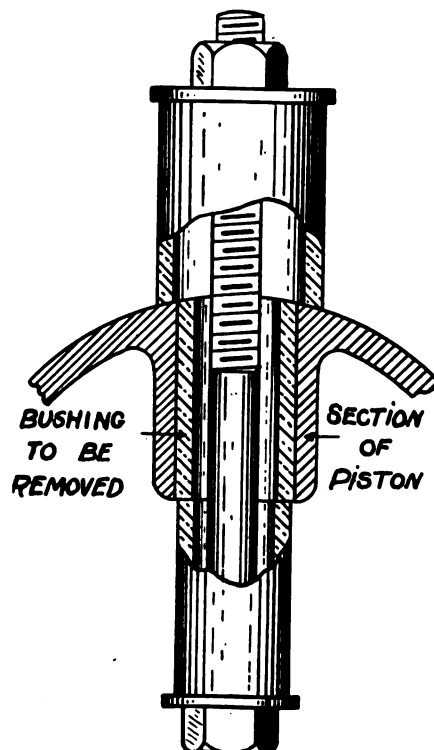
PRESSING THE WRIST PIN BUSHING OUT OF THE PISTON
